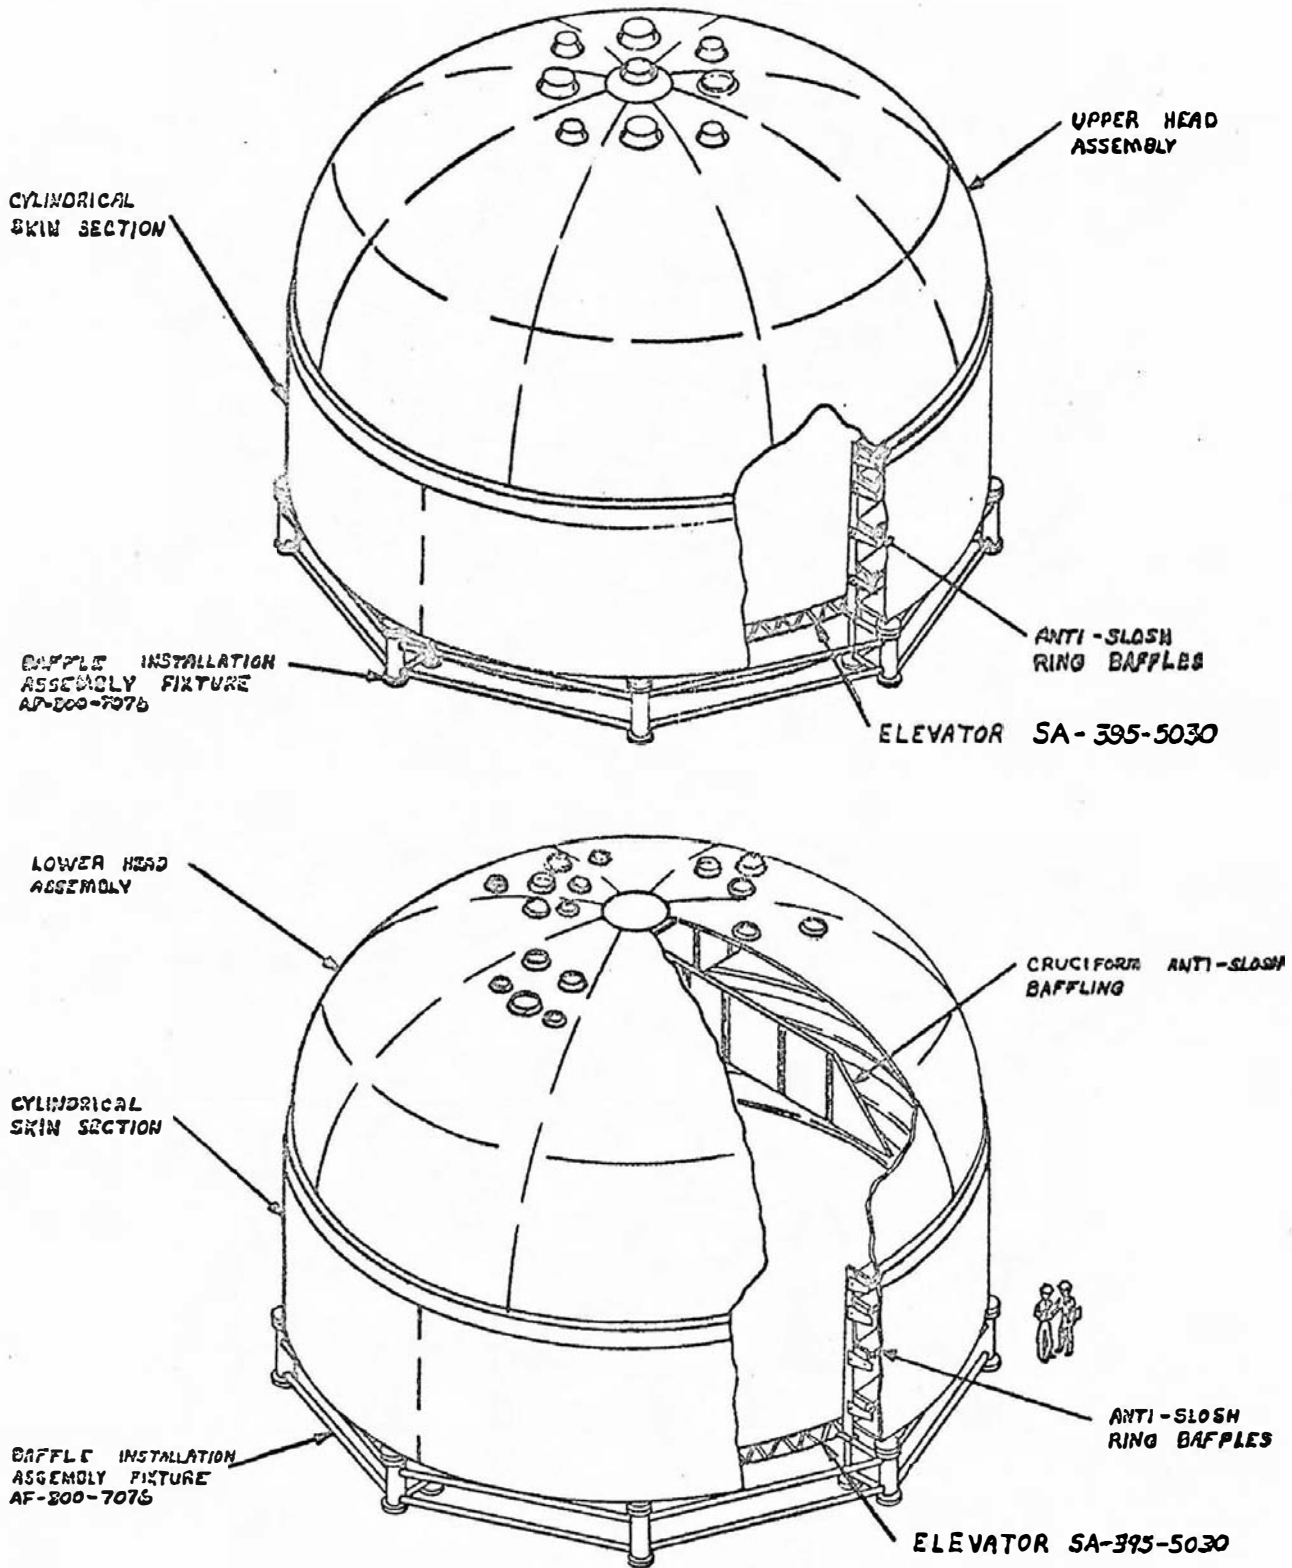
Baffle Installation (Fuel Tank Assembly)
